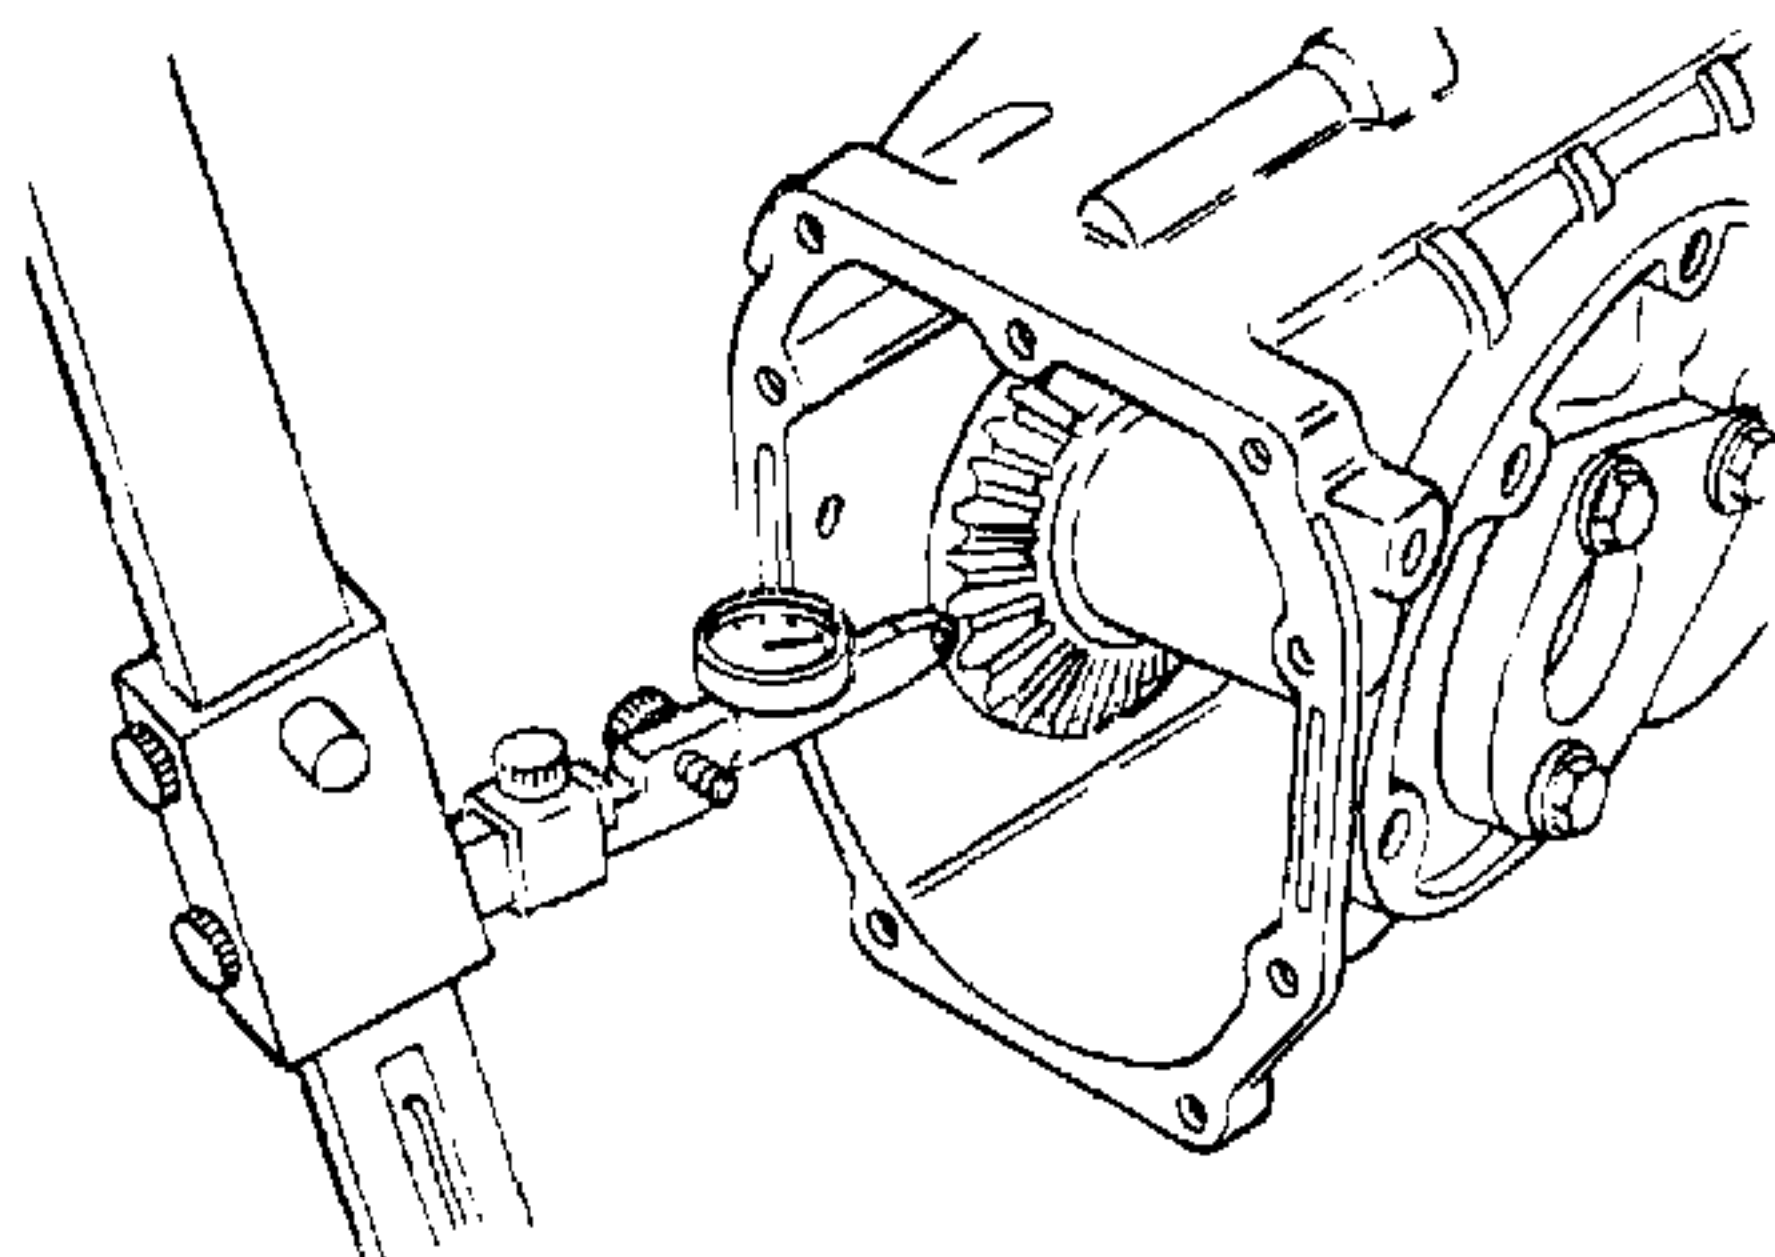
Measuring Ring Gear to Pinion Backlash.
